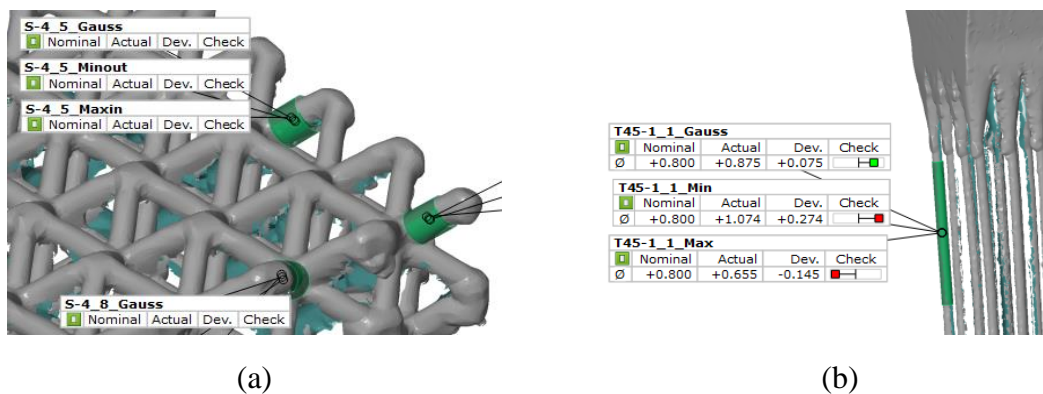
Example of strut part selection for inspection – (a) on structure; (b) on tensile sample
